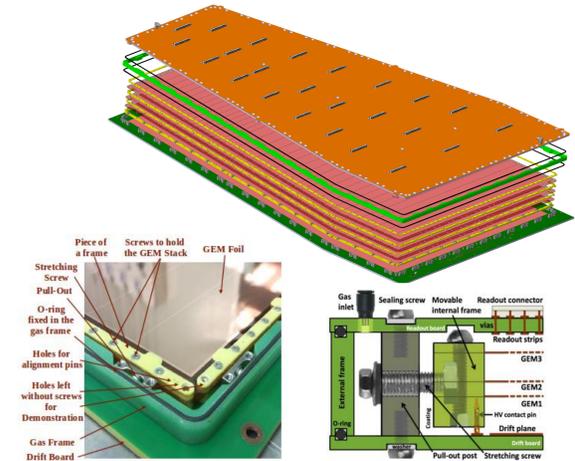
Top: Exploded view of the mechanical design of a ME0 triple-GEM detector module and its main assembly components. Bottom: Magnified view of the section of the ME0 module with GEM foils stack tensioned against the pull-outs mounted onto the drift board and surrounded by outer frame having O-ring on its grooves (left). Concept and mechanism employed to stretch the GEM foils (right).
